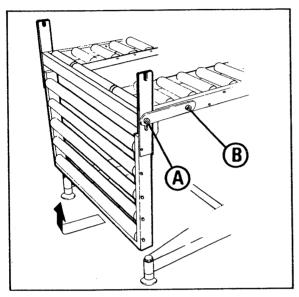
CONVEYOR EXTENSION - PARTS ILLUSTRATION
